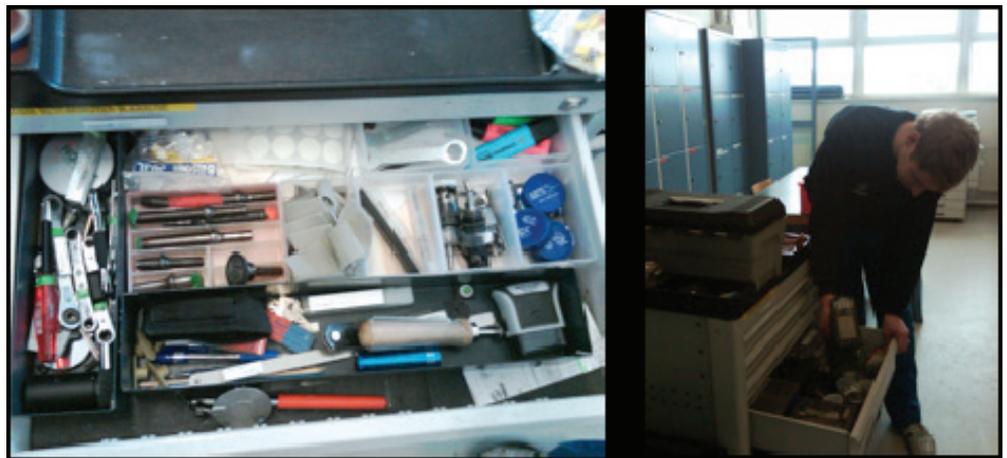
Tool Carts used with a Handheld RFID tag reader enable accurate inventory
